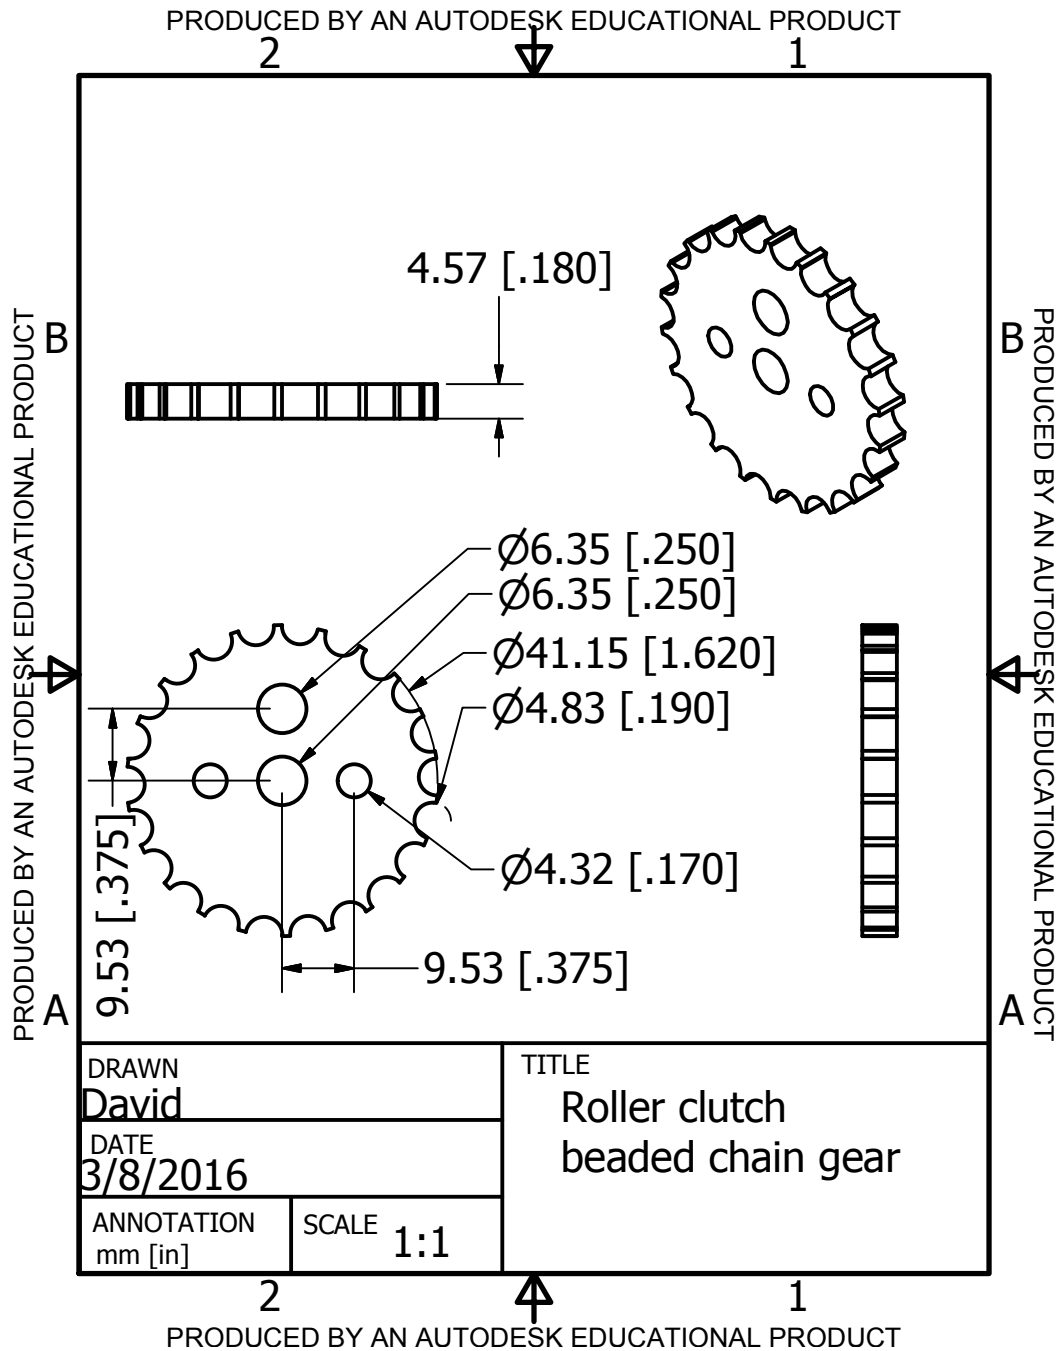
This wheel mates with a commercial window blind’s beaded chain. Two long 6-32 screw connects through this wheel to the rest of rotating components of the blind assembly. When the beaded chain is moved, so will the entire window blind assembly.
